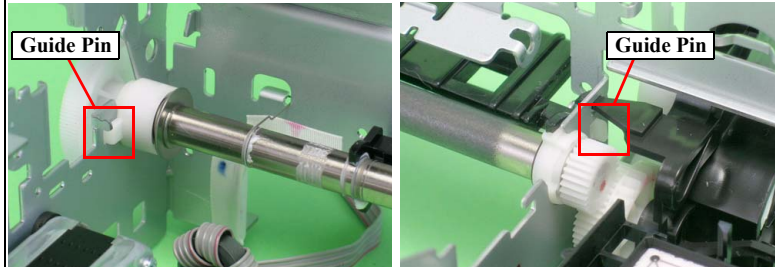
Reinstalling the Left/Right PF Roller Bushings
